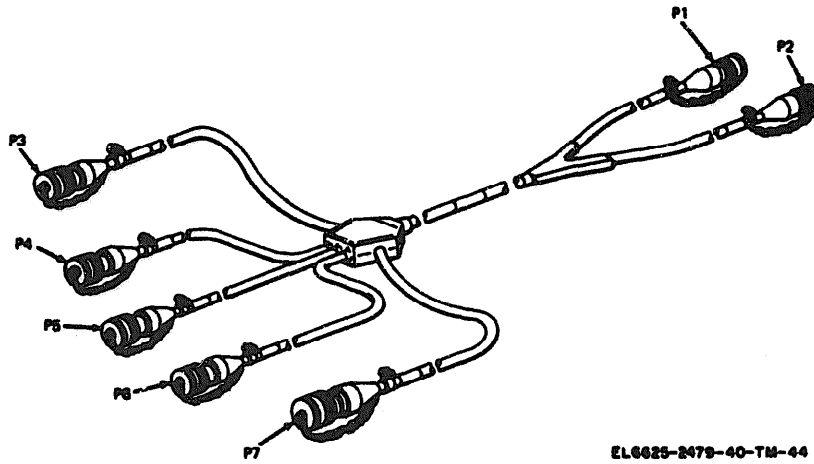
Cable Assembly, Special Purpose, Electrical, Branched CX-12716/AYM-8, parts location.
